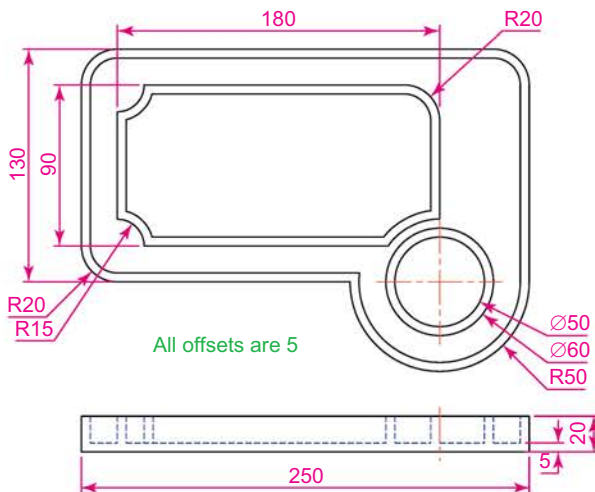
Sixth example – Copy Faces tool – details of the 3D solid model
